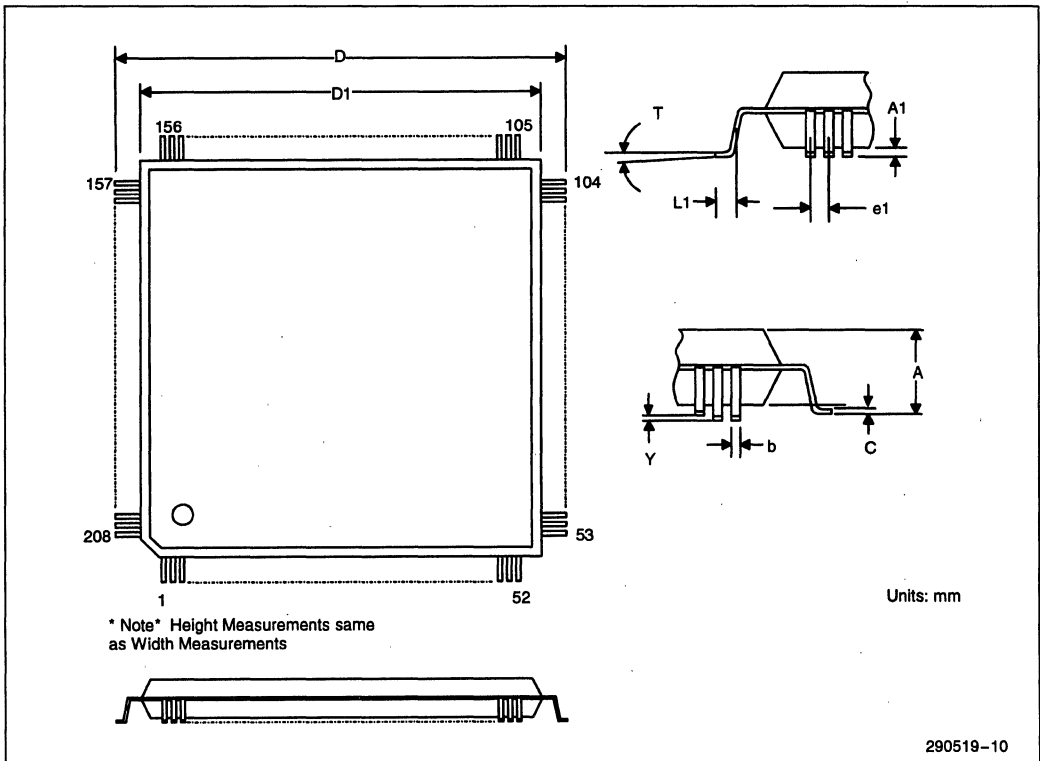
208-Pin Quad Flat Pack (QFP) Dimensions
